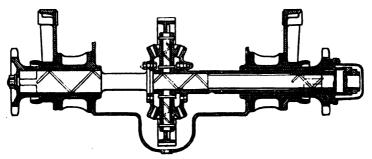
The Lancashire heavy-freight steam vehicles. Sectional view of compensating gear transmission shaft.
